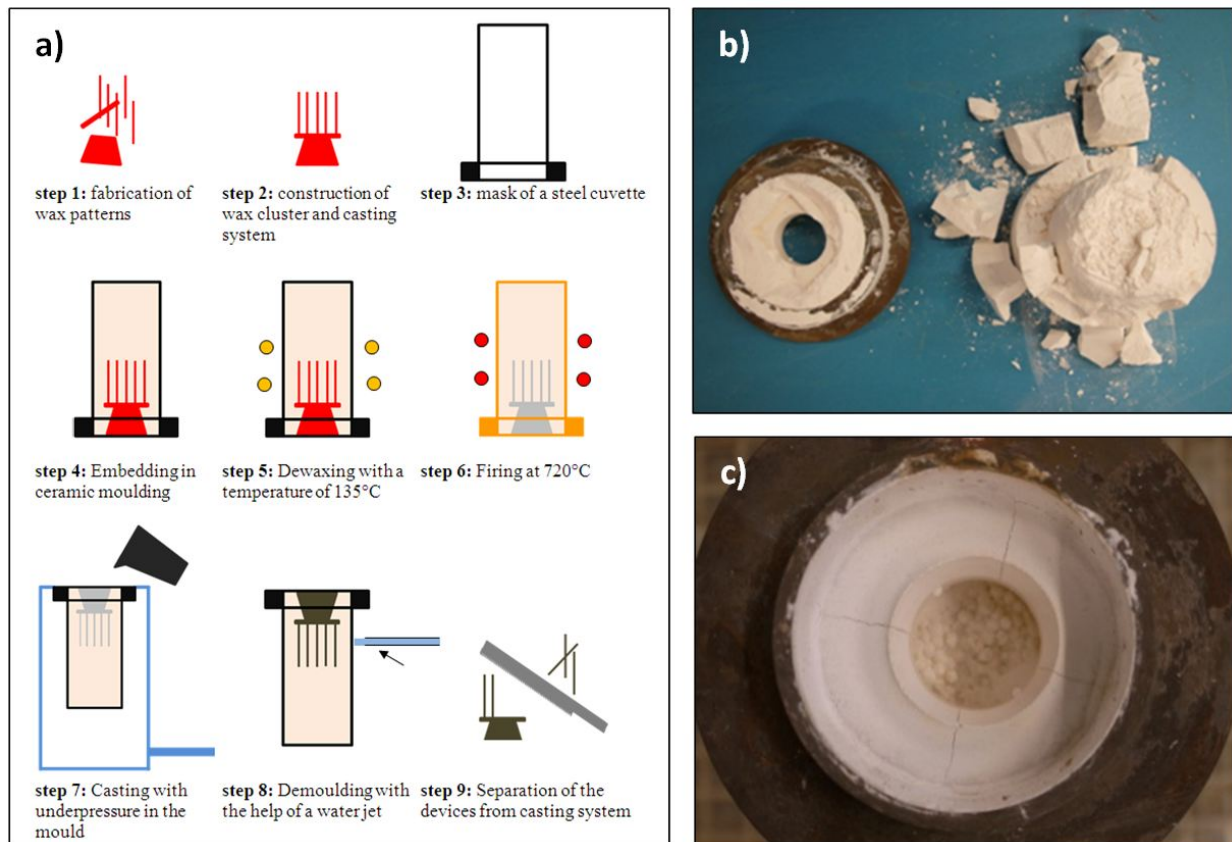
a) Basic steps of the block mould casting process. b) Fired block mould without stabilising cuvette. c) Block mould with cracks after the firing process.
